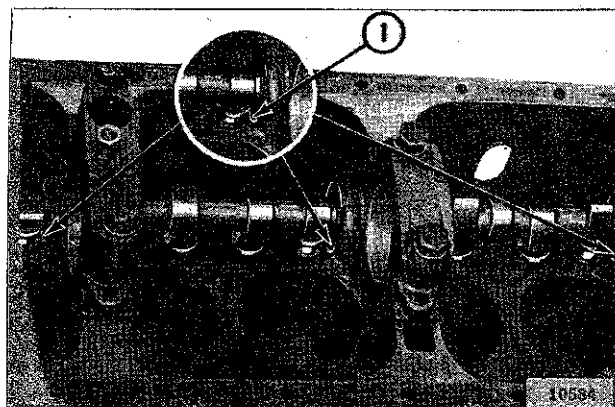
CAMSHAFT JOURNAL AND TAPPET INTERFERENCE
